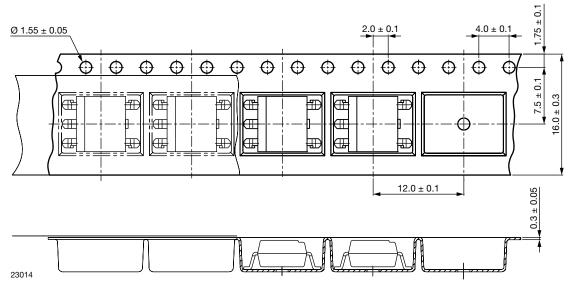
Tape and Reel Packaging (1000 pieces on reel)
